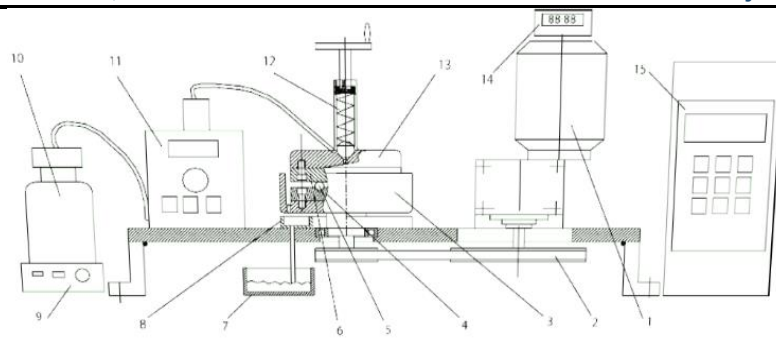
Novel eccentric lapping machine ^[3] (1) AC motor and gearbox combination; (2) pulleys and belt; (3) flange shaft; (4) lower plate; (5) ceramic ball; (6) upper plate; (7) lapping fluid collection tank; (8) lapping fluid tray; (9) Magnetic stirrer; (10) lapping fluid container; (11) pump; (12) spring-loading unit; (13) Backing plate; (14) time counter; (15) Micro Master inverter.
